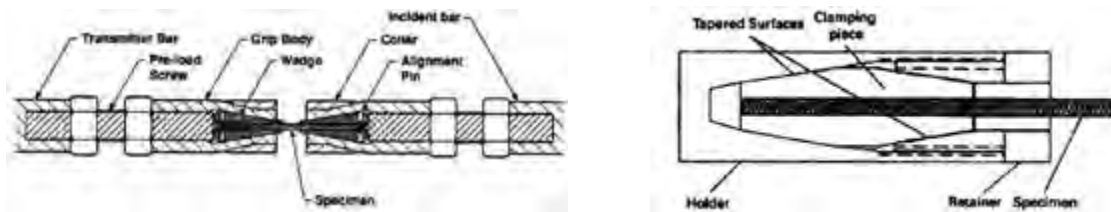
The specimen fixture design by Eskandari and Nemes [43].
